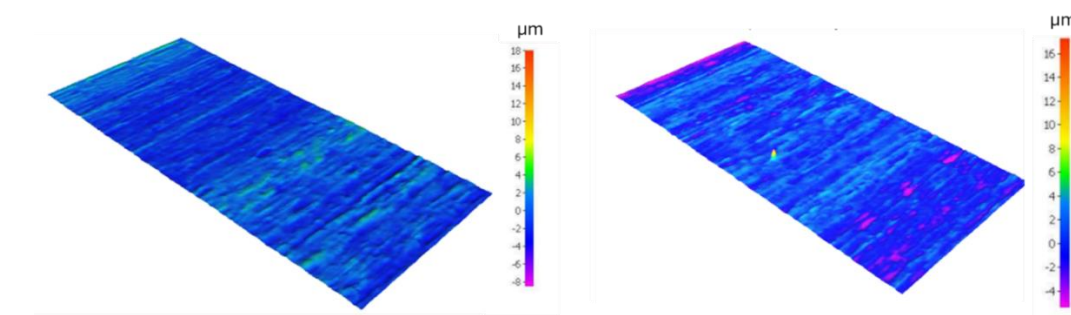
Surface quality machined with a) coated tool b) uncoated tool.
